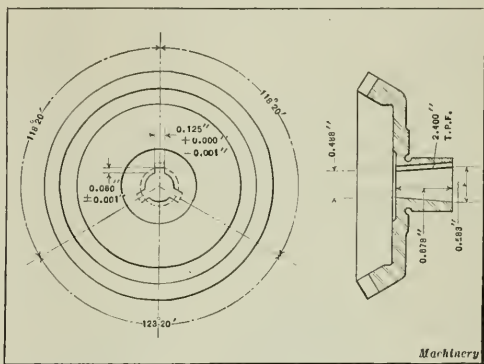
Design of Work to be shaped on the Machine shown in Fig. 5
